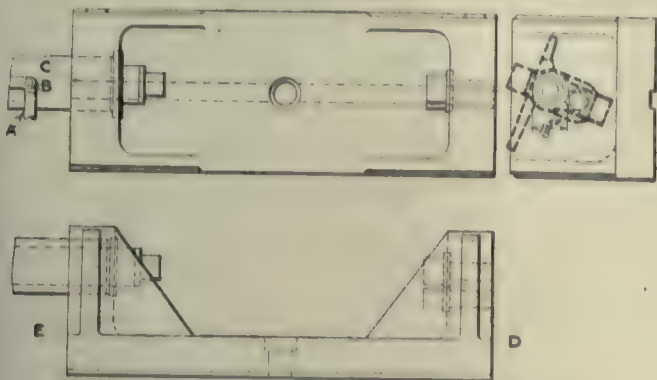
MILLING-EJECTOR CLEARANCE SLOT
